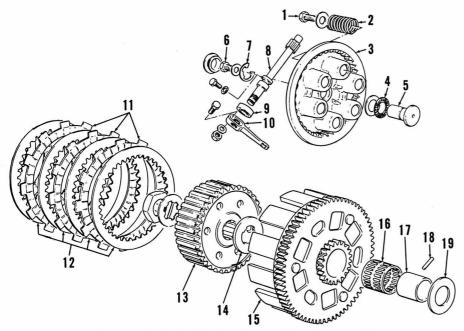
Exploded view of TM 400 R clutch assembly.
